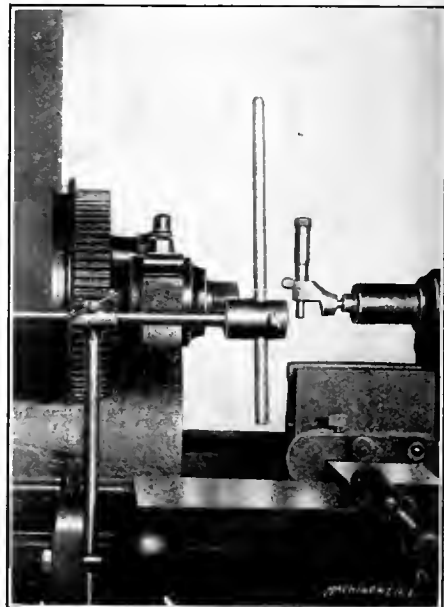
Setting a Boring Tool to the Correct Diameter.
